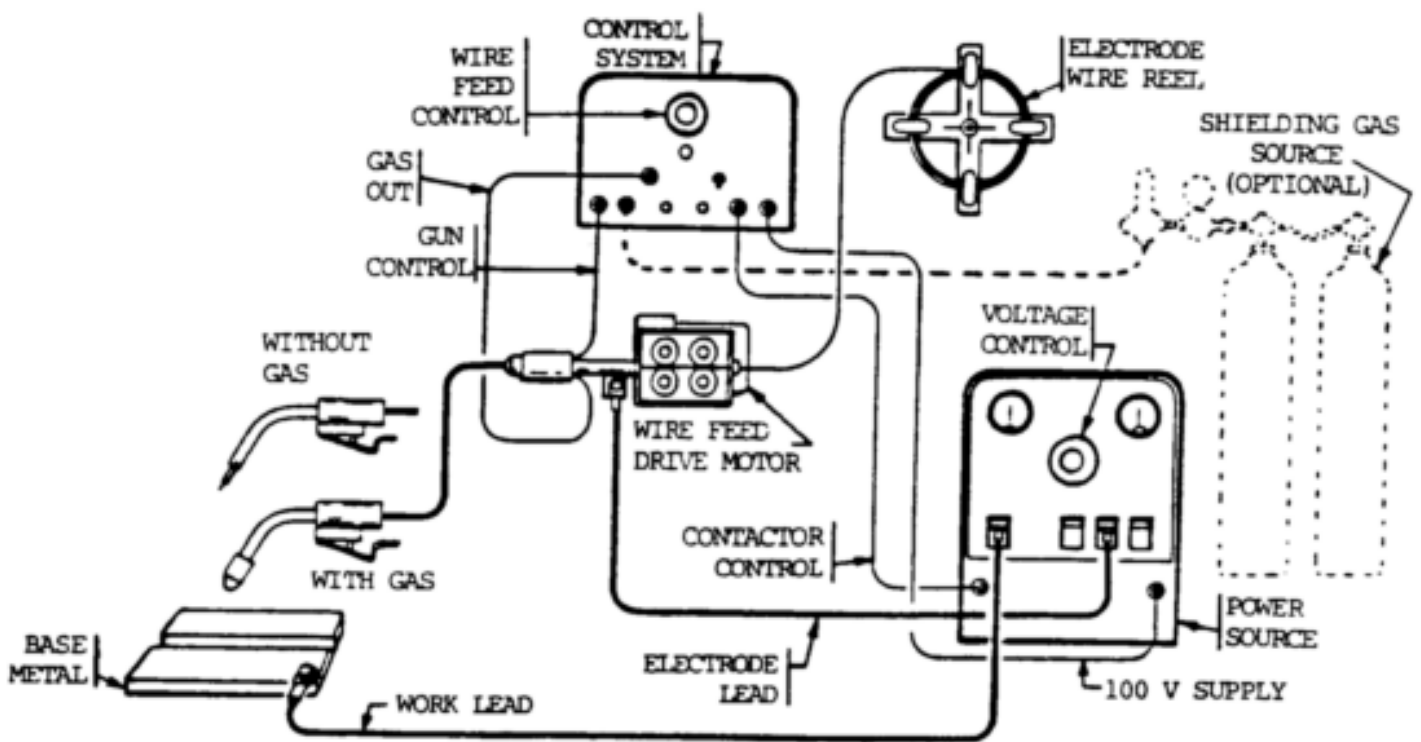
Equipment for flux-cored arc welding.
